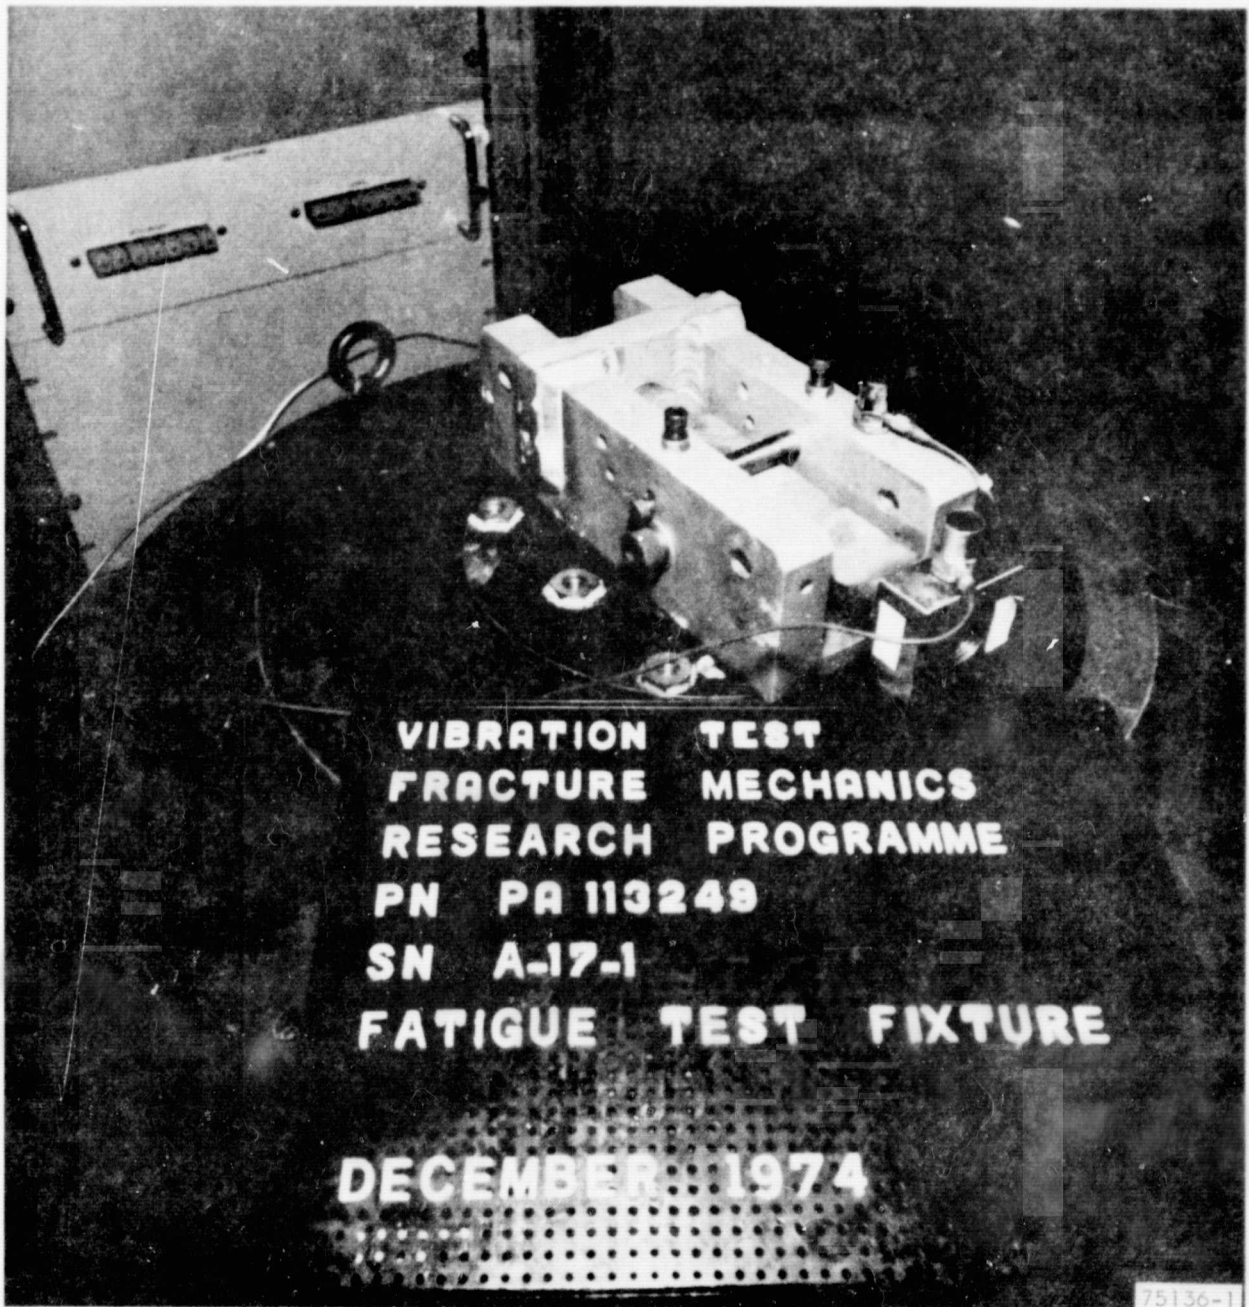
Fracture Mechanics Specimen on Fixture, Mounted on Vibration Table for Precracking by Fatigue
